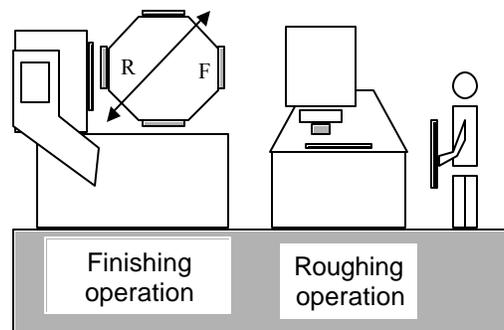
Company B – two machines separately performing roughing and finishing operations.
